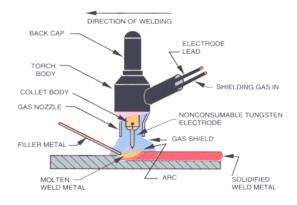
Schematic of GTAW Technique (http://www.spectroweldinstitute.com)
